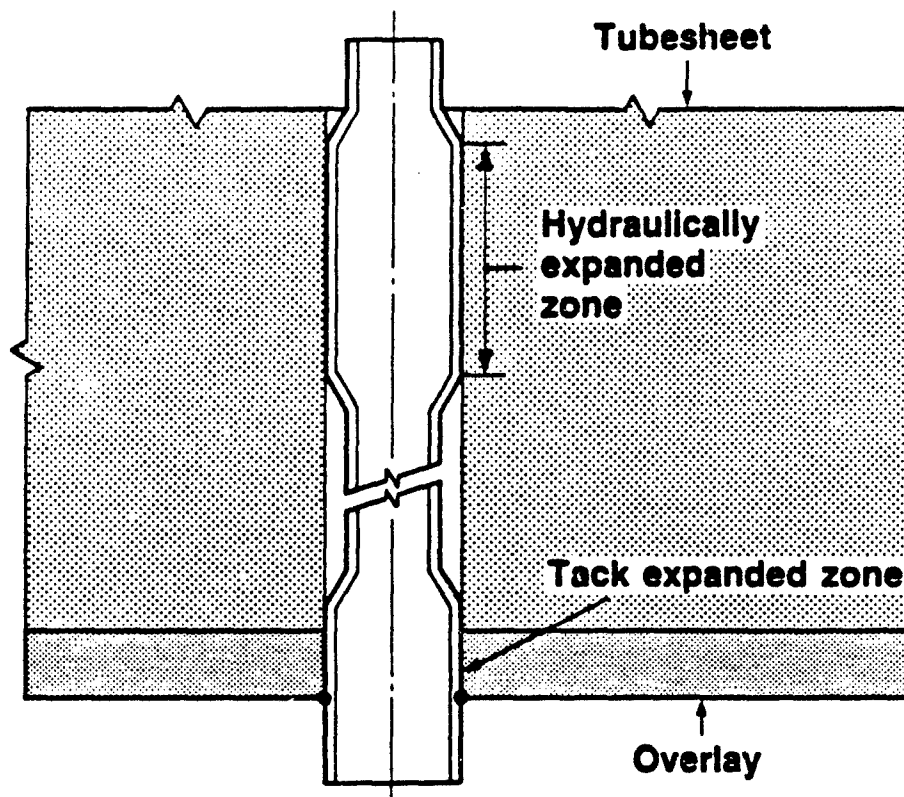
TUBE TO TUBESHEET JOINT DETAILS
